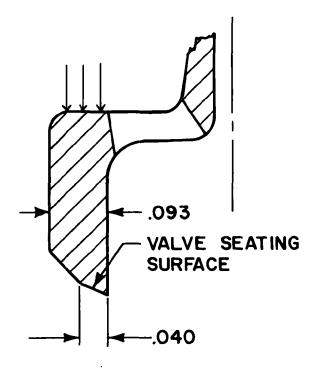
19 Valve Seat Profile to Reduce Opening Pressure Force on Valve.
